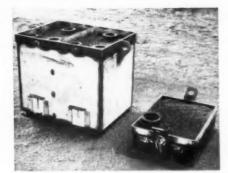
The Finished Mold Bedded in the Steel Shot and Ready for Casting
